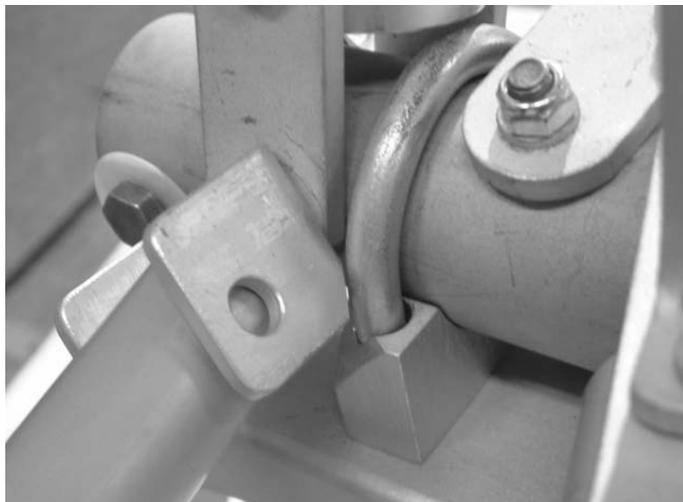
; side member attachment bracket and undercarriage leg outer clamp, starboard side.
